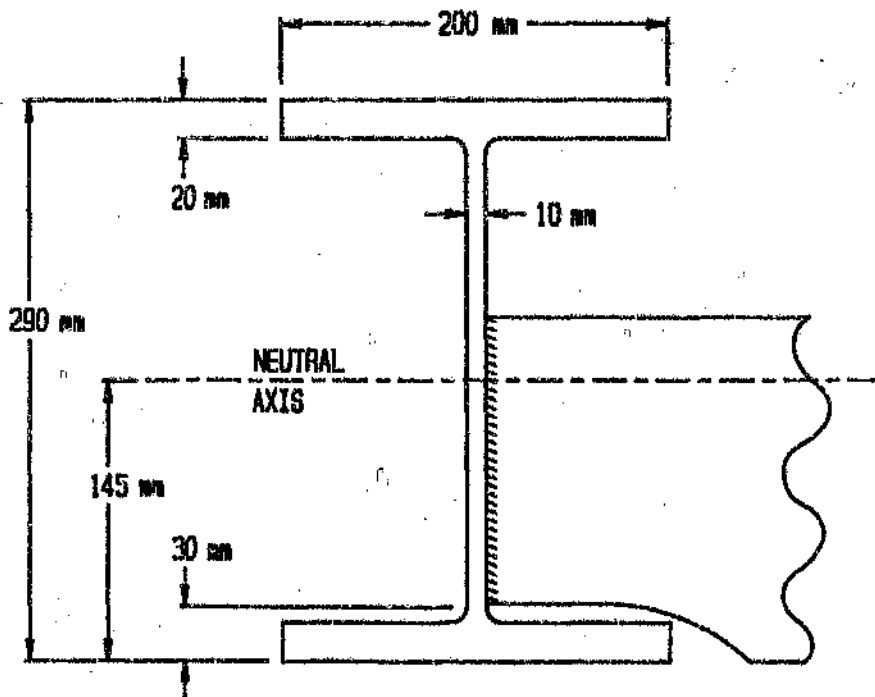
Chassis I-beam cross-section at the rearmost upper coupler cross-member
